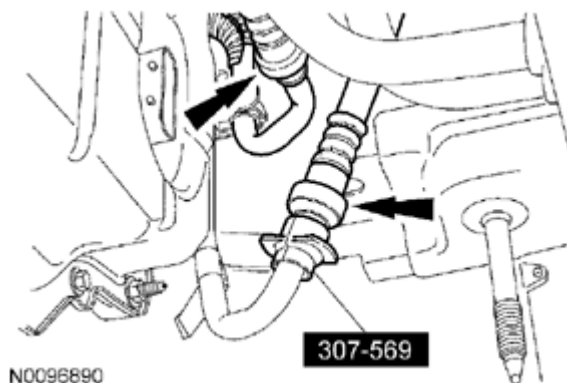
Disconnecting Transaxle Fluid Cooler Tubes Using Transmission Cooler Line Disconnect Tool
